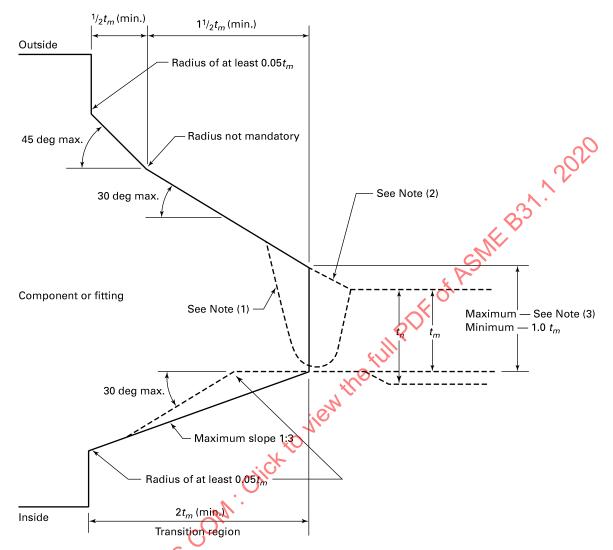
Welding End Transition — Maximum Envelope
